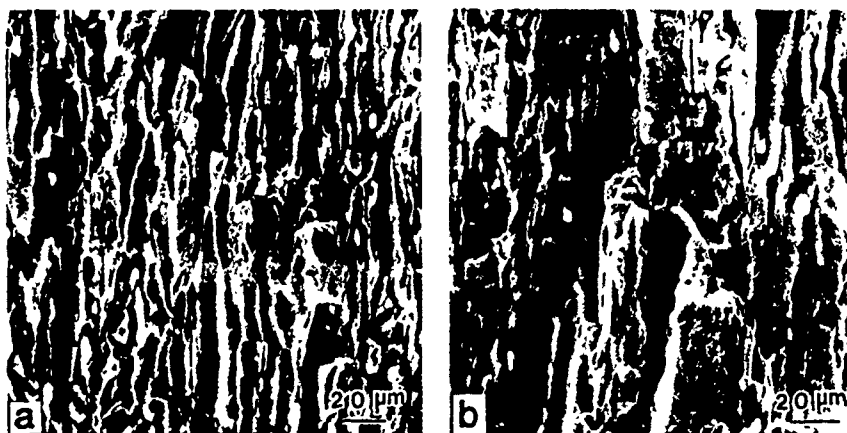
Fractography of compact tension specimens tested at (a) 300 K and (b) 77 K.
